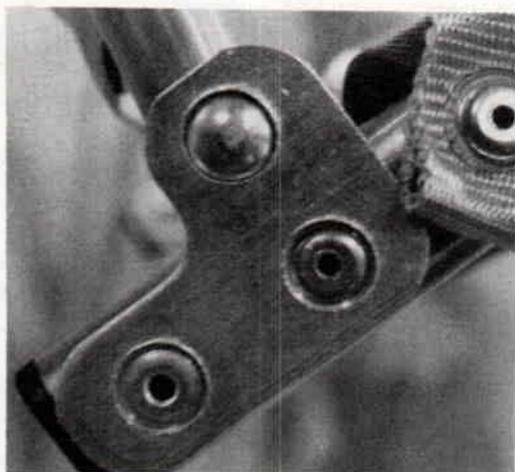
The remaining bracket is reattached to the seat bottom with pop-rivets.
